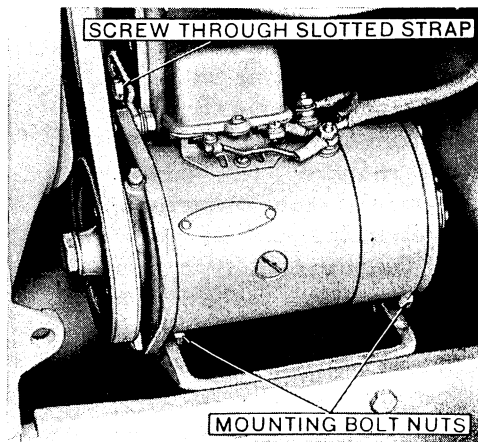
Generator Mounting Bolts and Strap Bolt for Generator Belt Adjustment
